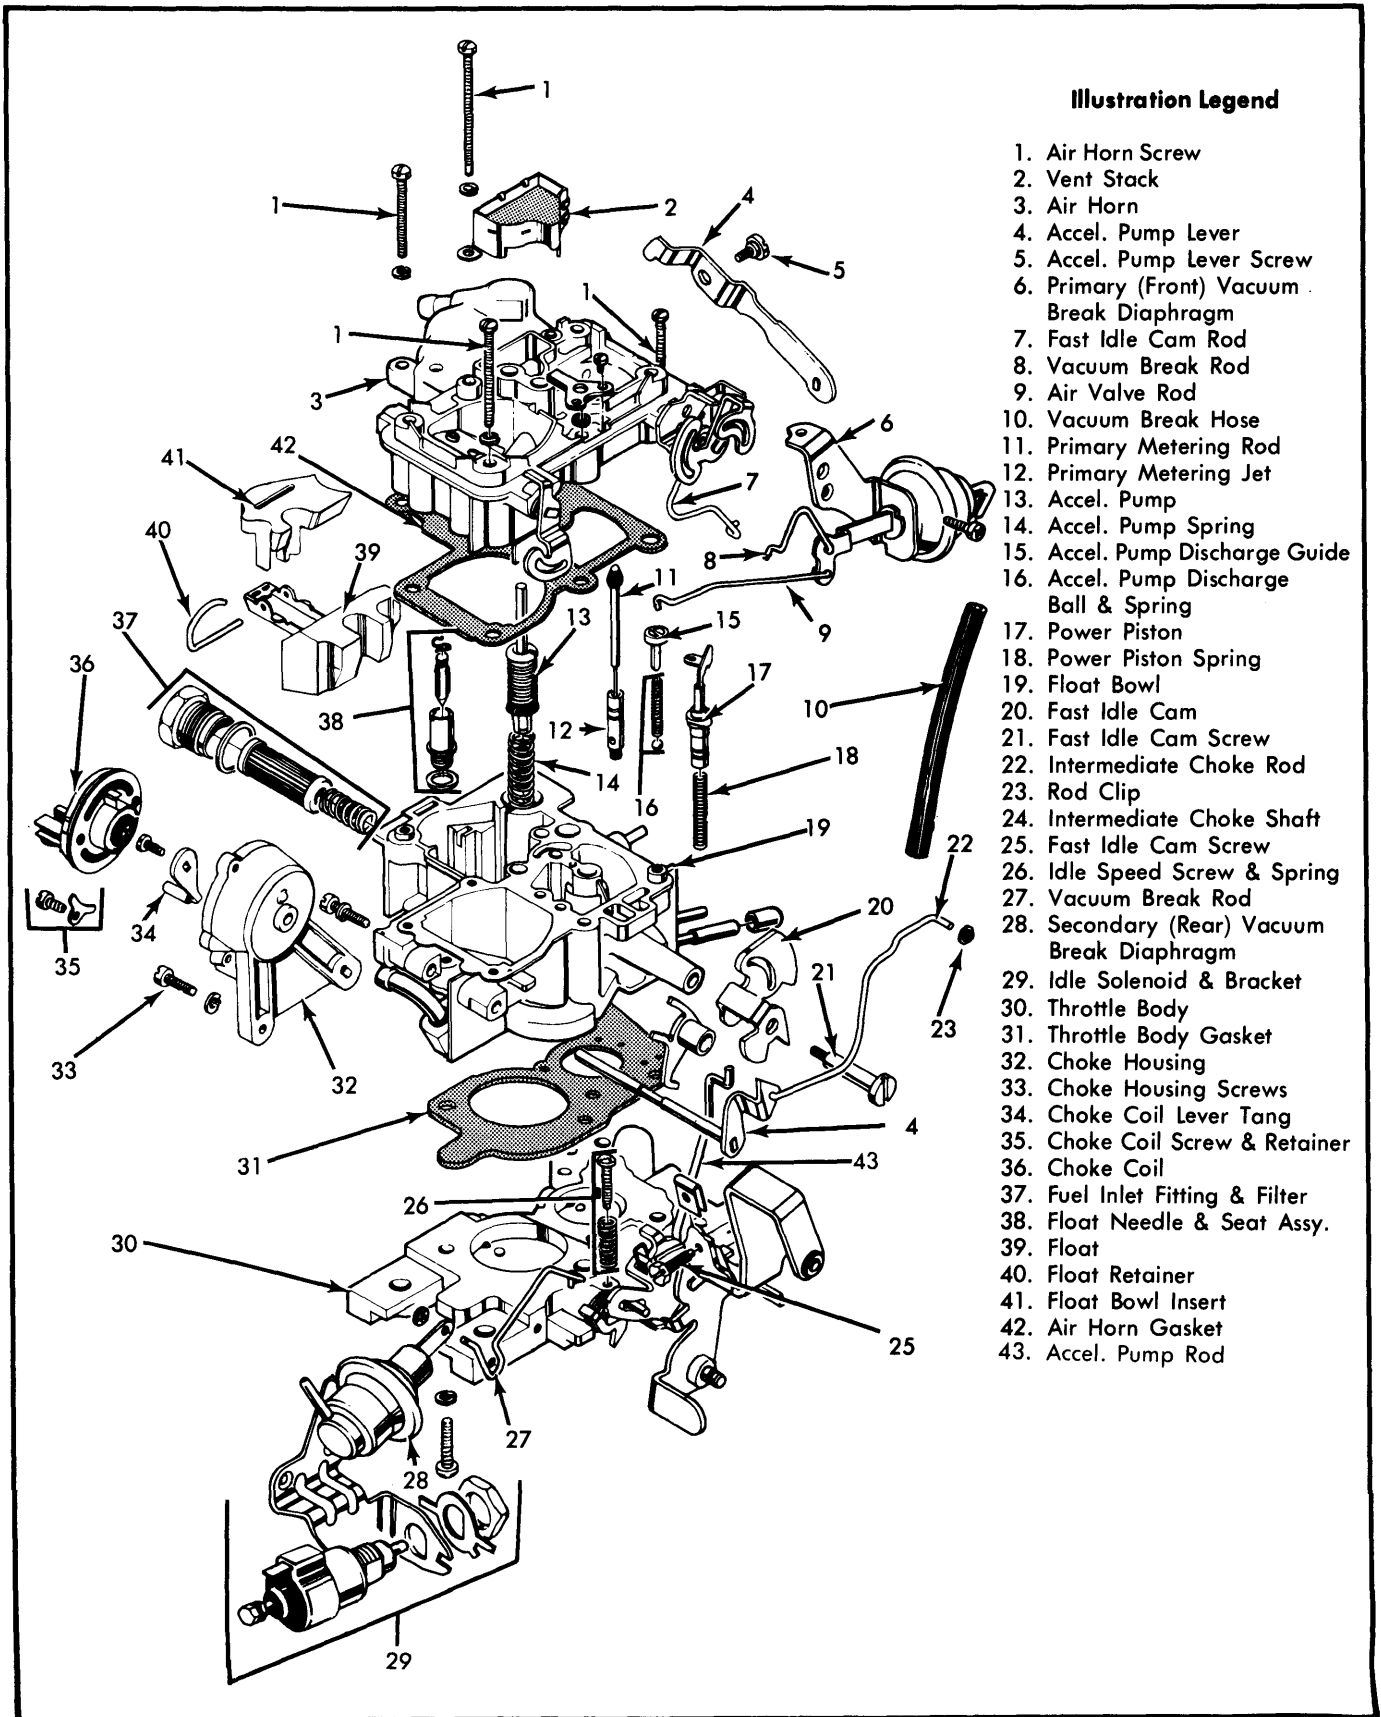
Exploded View of Rochester Model 2SE 2-Barrel Carburetor (6 CYLINDER MODELS)
